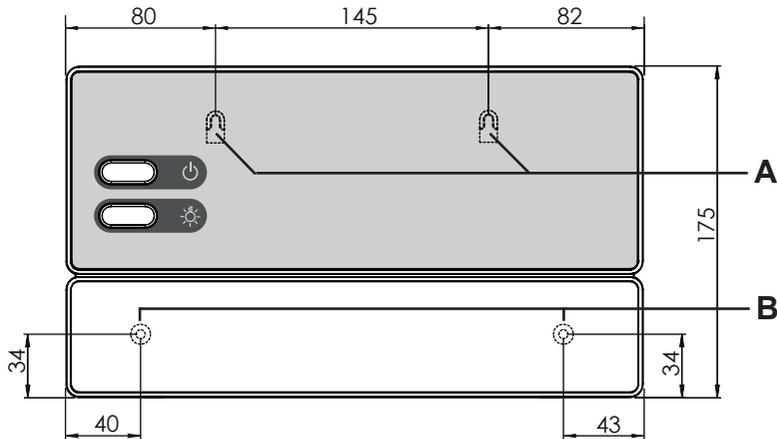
Position of the attachment device and the installation holes (dimensions in mm)
